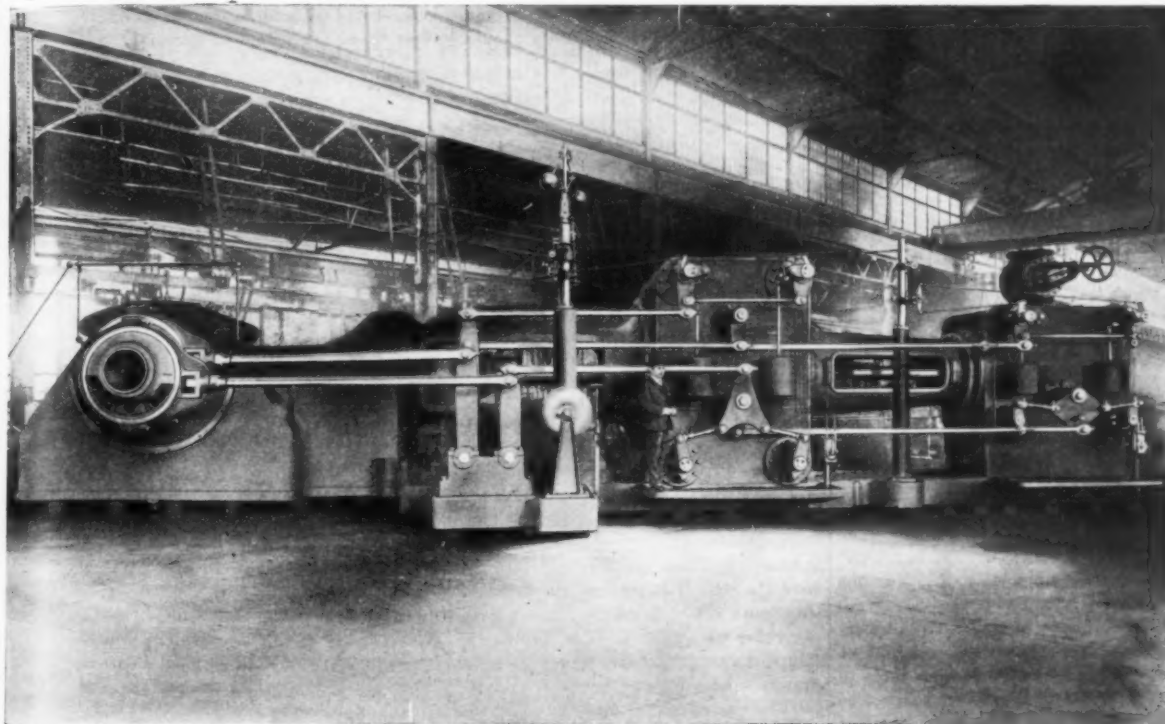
ERECTING A 42x74x54-INCH ROUGHING MILL ENGINE.
